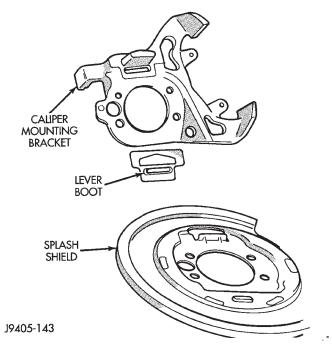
Caliper Bracket, Splash Shield And Lever Boot
